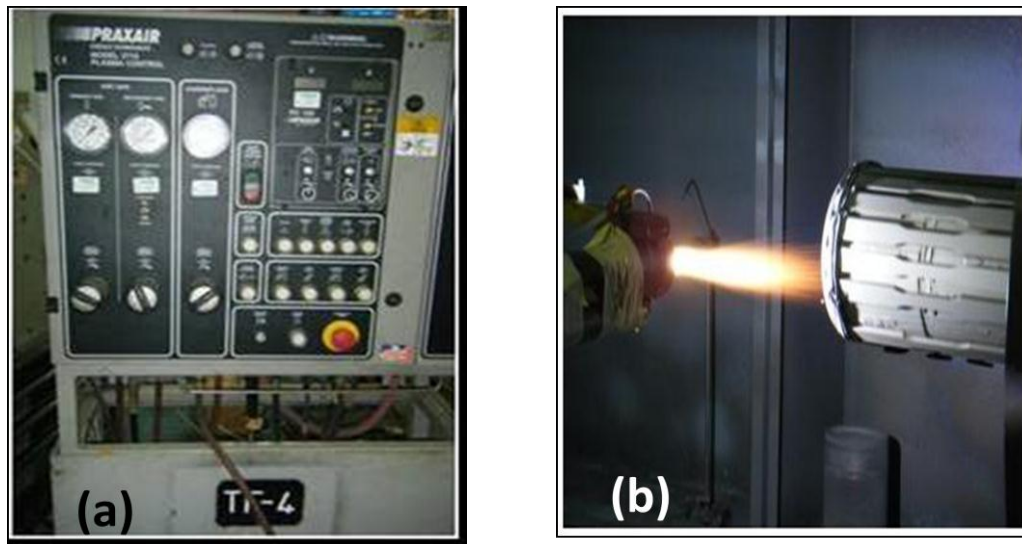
, (a) Model 3710 Praxair used to produce the coating and (b) SG-100 Plasma Spray Gun.
